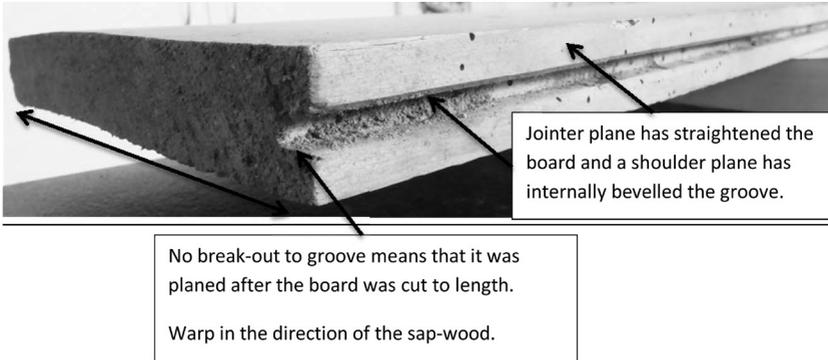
Hand saw marks to the board end but no break-out in the groove indicate that planing occurred after cutting.
